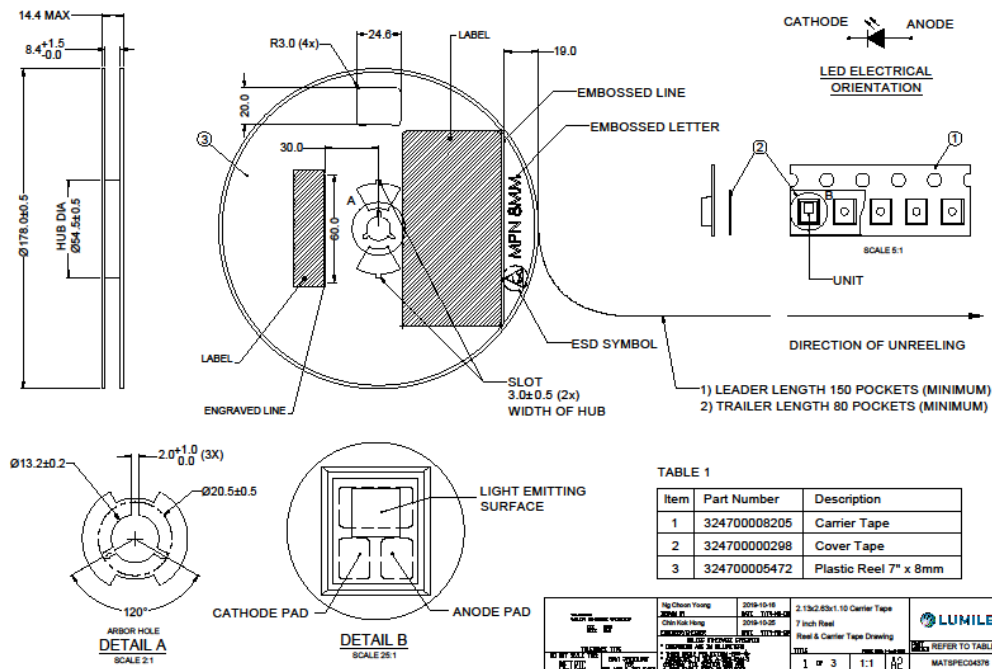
Reel dimensions for LUXEON FX2-L PC Amber
